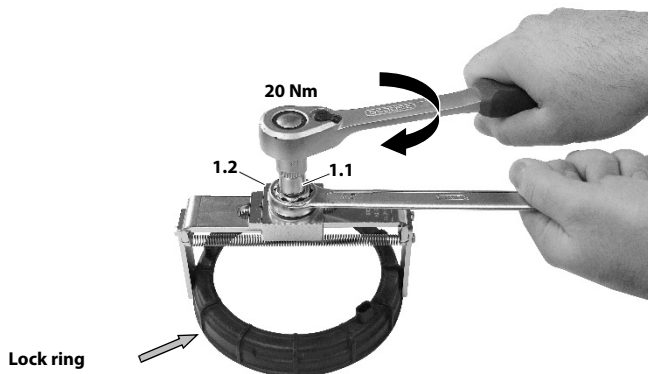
Loosening/Tightening the fuel tank sender lock ring.
